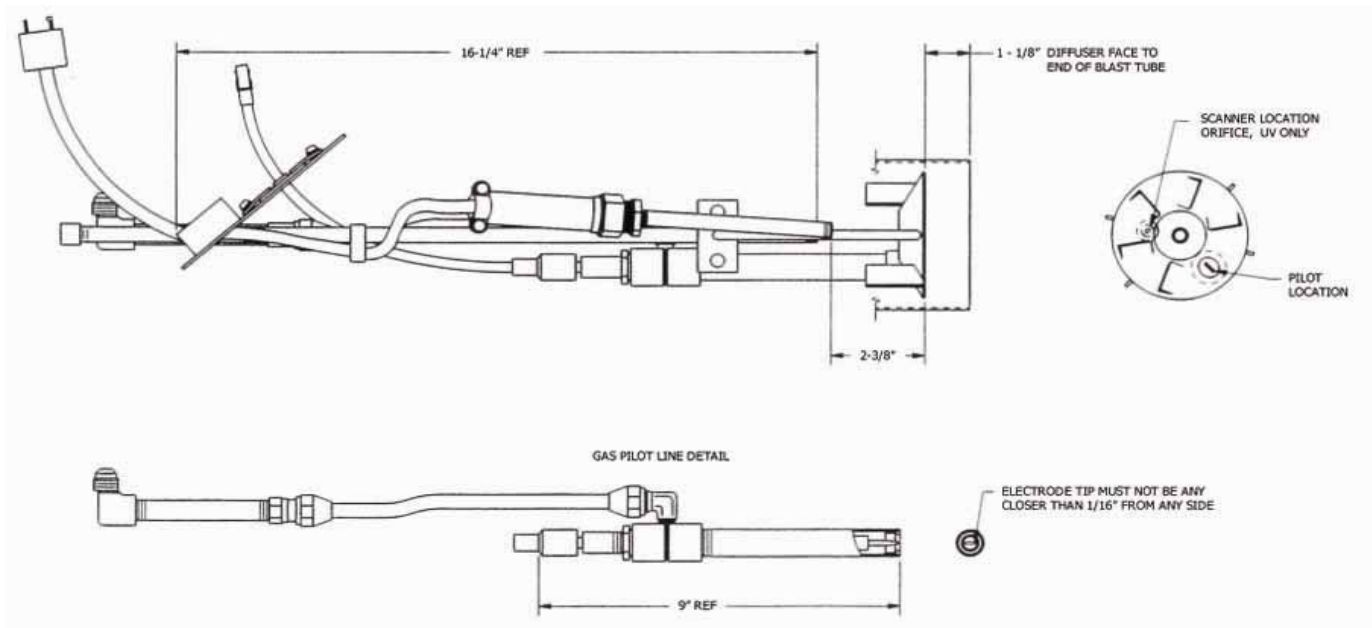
FPG 5 & 7 Drawer Assembly with Gas Pilot
